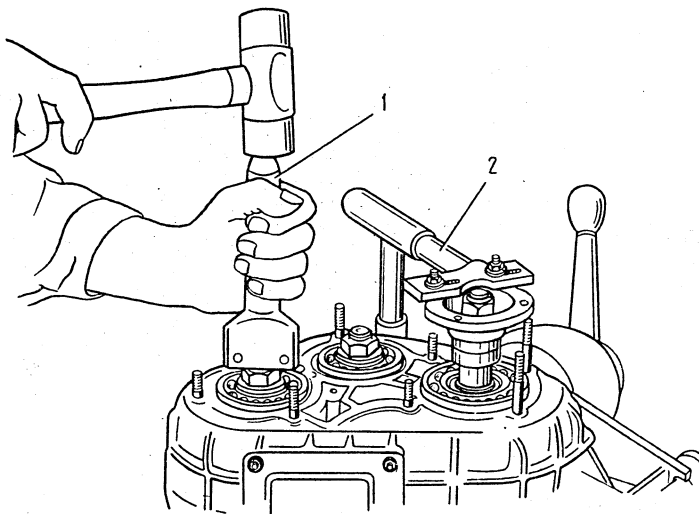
Pressing the Rear Axle Drive Shaft Flange Nut:
